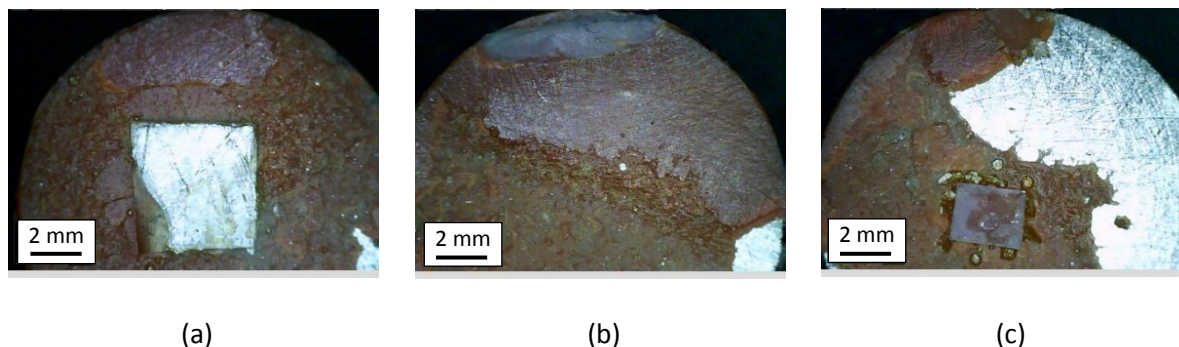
Fracture surfaces of specimens with artificial defects: a) specimen with internal defect; b) specimen with surface defect; c) specimen with surface and internal defects.
